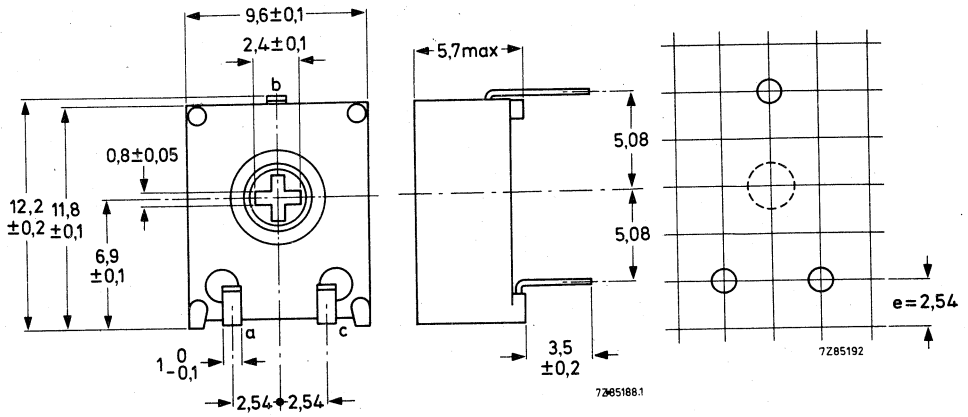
Horizontal mounting, version with cross-shaped recess (non-insulated hot wiper, b).
